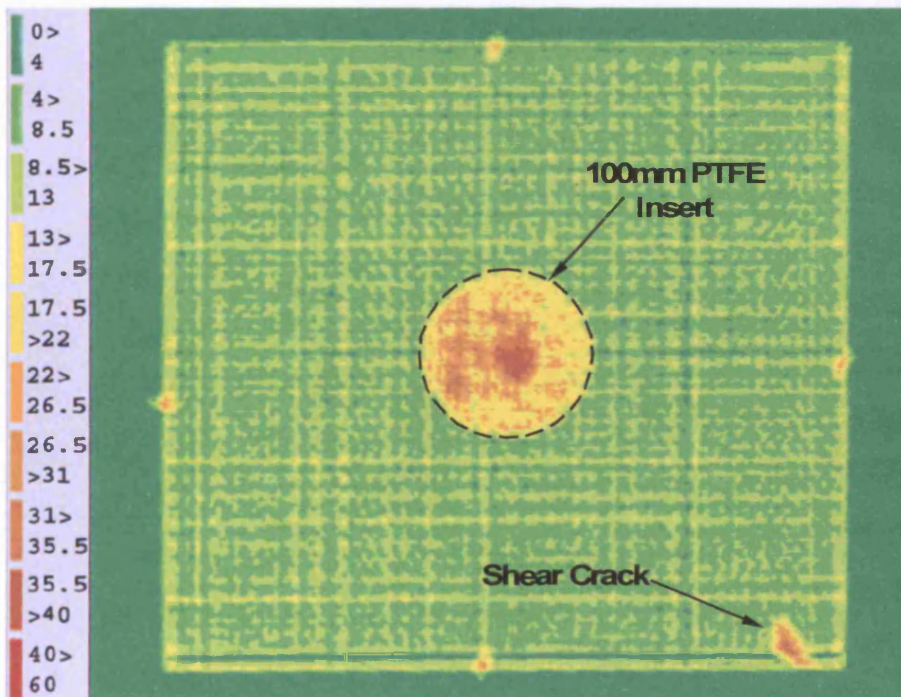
Specimen 8 C-scan Image after stage two testing
